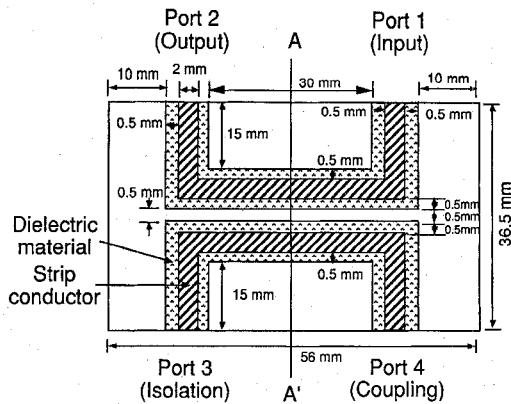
Top view and dimensions of fabricated couplers. Two types of couplers were fabricated and they have identical dimensions for the top surface as shown here.
